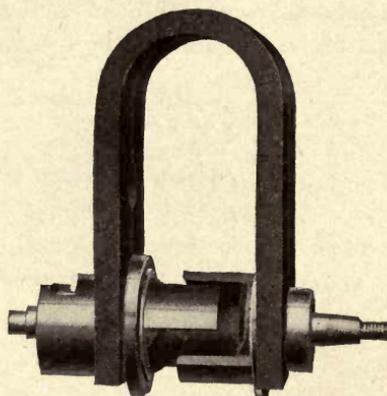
Magnets and rotor of Dixie 12-cylinder magneto.
